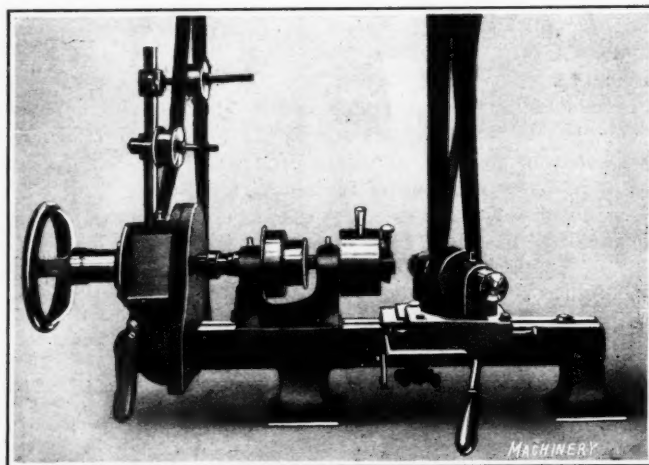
Front View of Machine for roughing out Powder Train Groove
